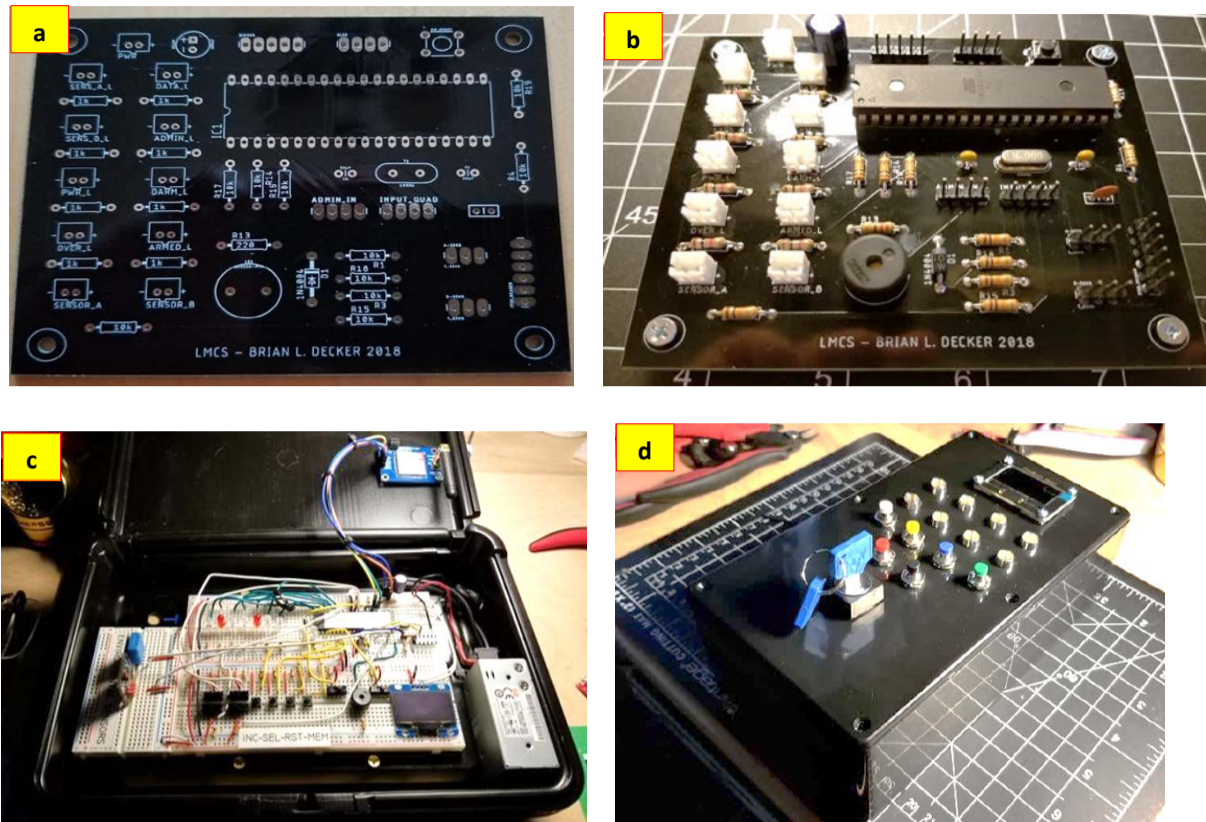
(a) PCB circuit design; (b) board assembled; (c) LEMRSCS prototype; and (d) final LEMRSCS in the enclosure
